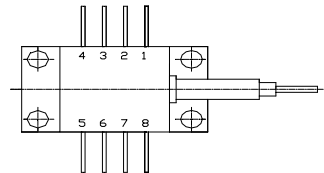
8 pins butterfly modules Outline dimensions diagram.
